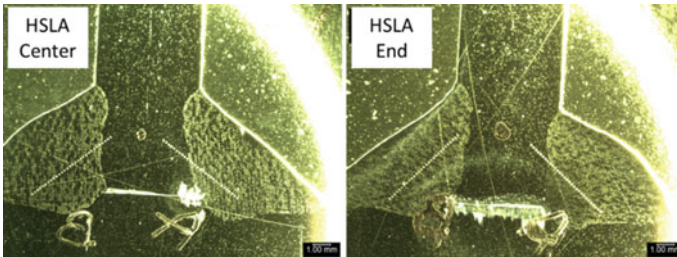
HSLA-50 T-weld joint hardness traverse for the 'Center' section (left) and 'End' section (right) for welds on both sides (side-A and side-B)
